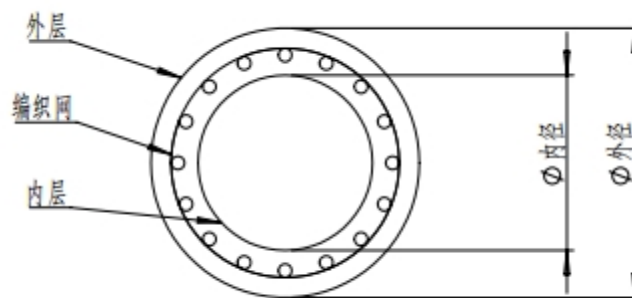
Cross-sectional view of the Shaft (Sectional View A)
